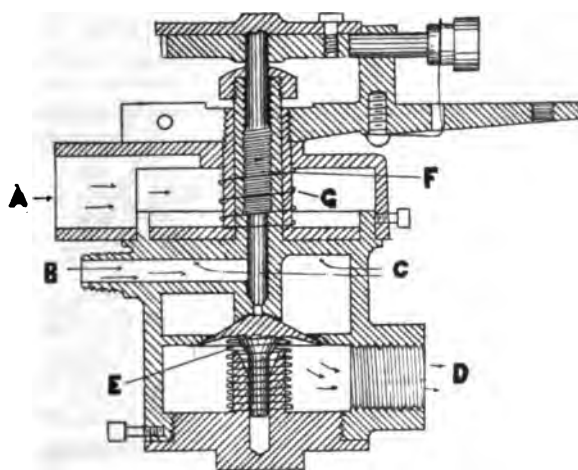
Sectional Diagram of the Haynes-Apperson Throttling Mixer. A, air inlet; B, gasoline inlet; C, C, location of air ports into mixing chamber; D, vapor exit to engine; E, mushroom valve held on seat by spring, opened by suction of engine piston; F, threaded needle valve spindle; G, spring for raising upper member of air chamber when released by screw motion of the levers attached to cover retaining screw and needle valve spindle, both being raised or lowered by the same movement.
